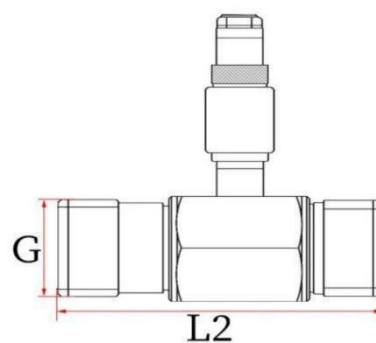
Dimensions of DN15~DN50 threaded flow sensor turbine flow sensor (excluding straight pipe section)
